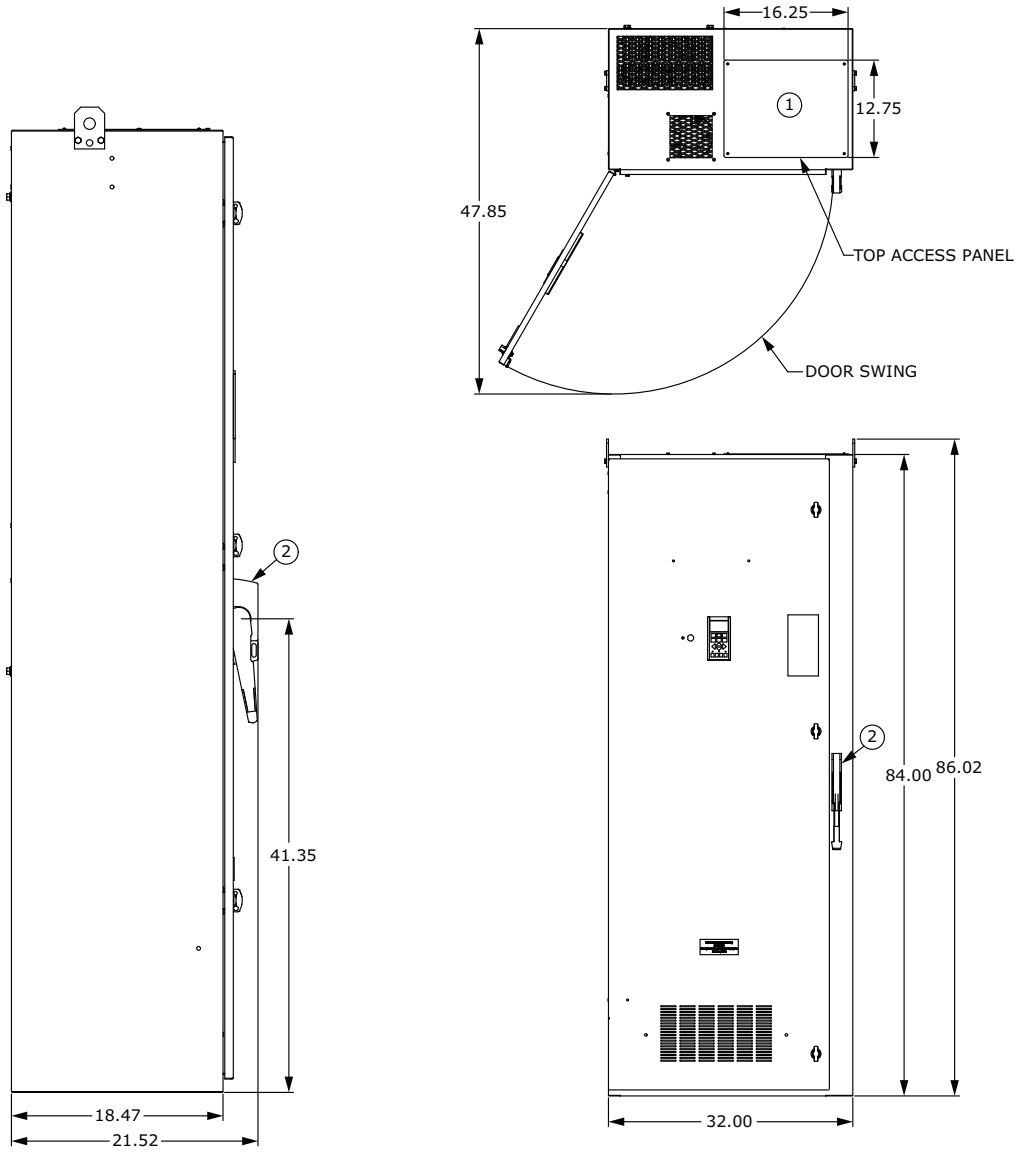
Top, front, and side view of D-Frame AFDH cabinet with dimensions (transition mount)
